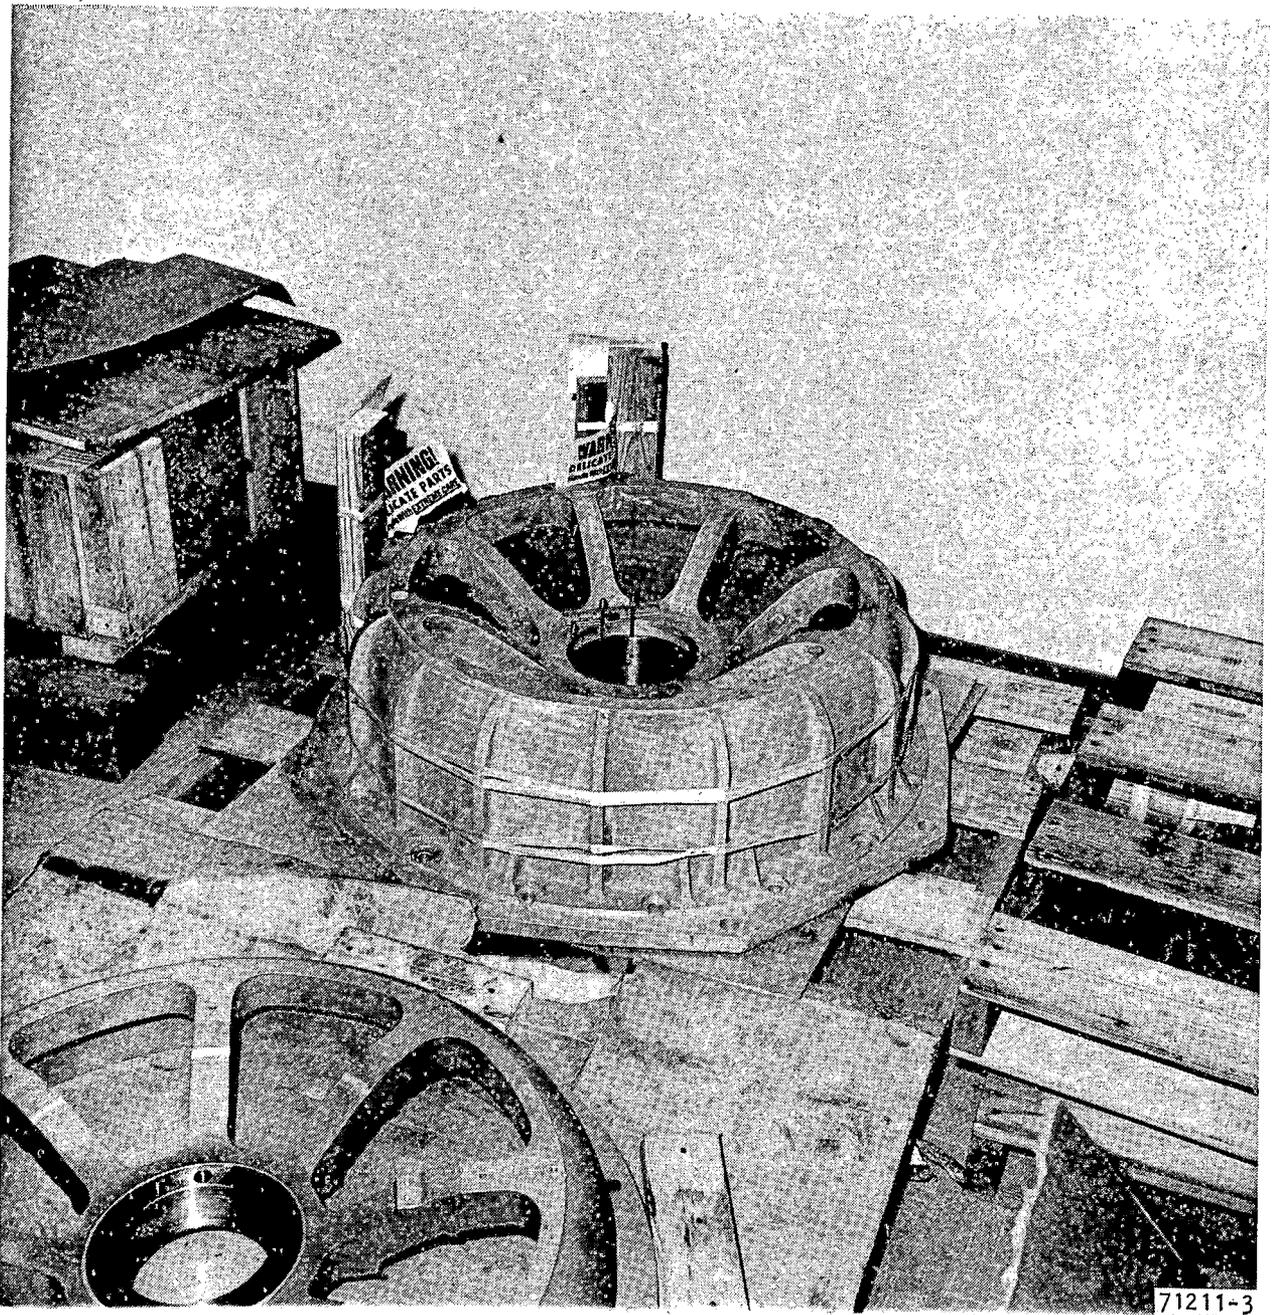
Lower End-Bell Casting with Cast-in-Place Coolant Line
